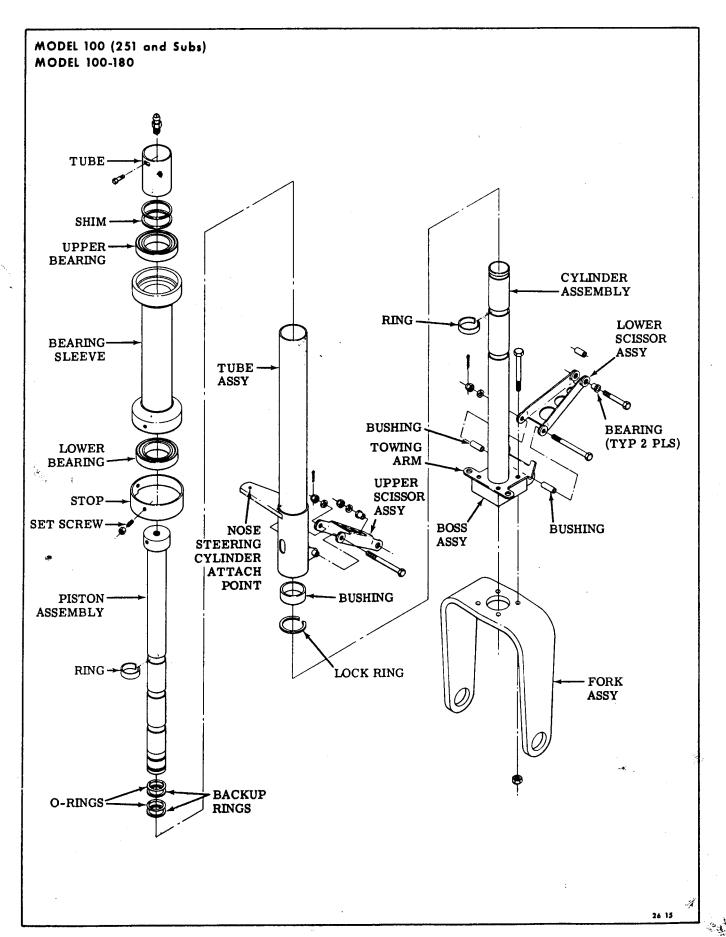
Nose Landing Gear (Sheet 2 of 2)
